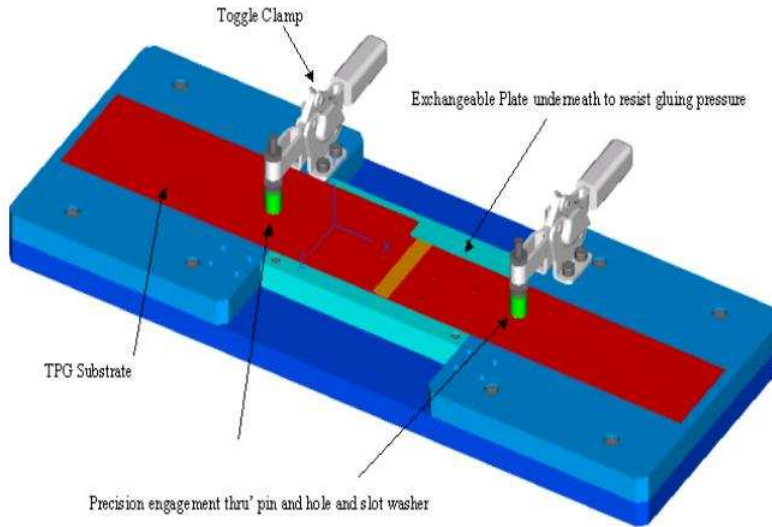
Schematic drawing showing the fixture used to assemble the pixel modules on the substrate.
